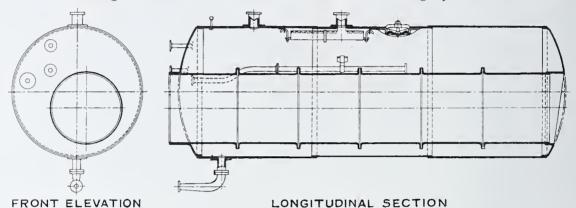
Cornish Boiler, Dish End Type with Eccentric Flue.
